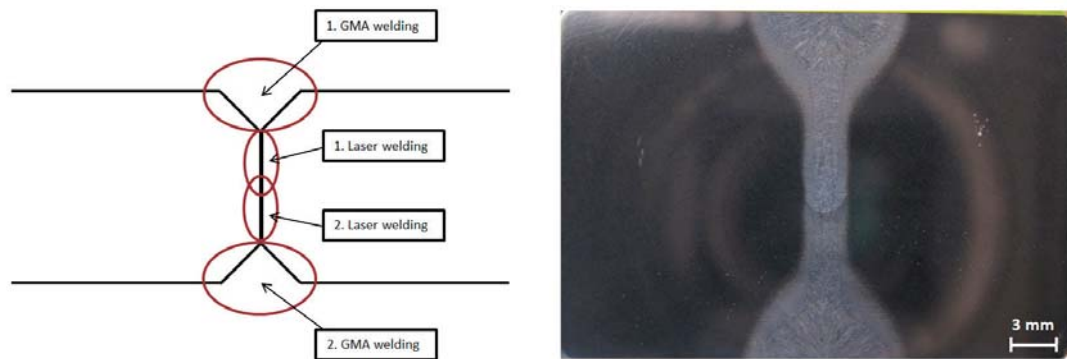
Laser-hybrid welding joint preparation (left) and a completed laser-hybrid weld section (right)
